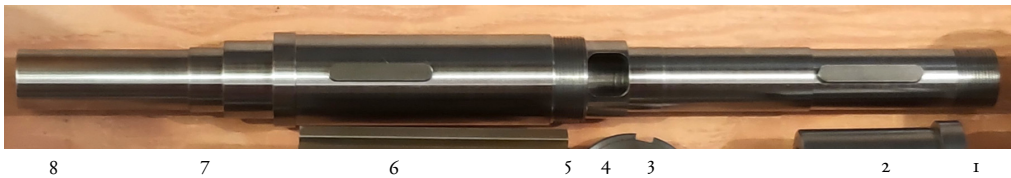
Photo of the shaft. The numbers from the right mark the position of: 1. Threads for the slipping clip nut. 2. slipping socket with wedge in place. 3. Cool side bearing. 4. Hole to the inner cable channel. 5. Threads for the rotor yoke clip nut. 6. Rotor yoke with wedge in place. 7. Hot side bearing. 8. Shaft end to connect to the other machine on the test bench.
